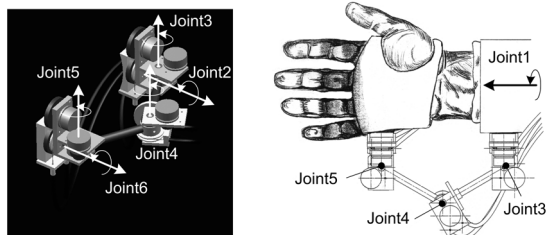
Wrist assembly. (left: 3D Catia model showing the joint axes, right: artist impression of attached assembly)
